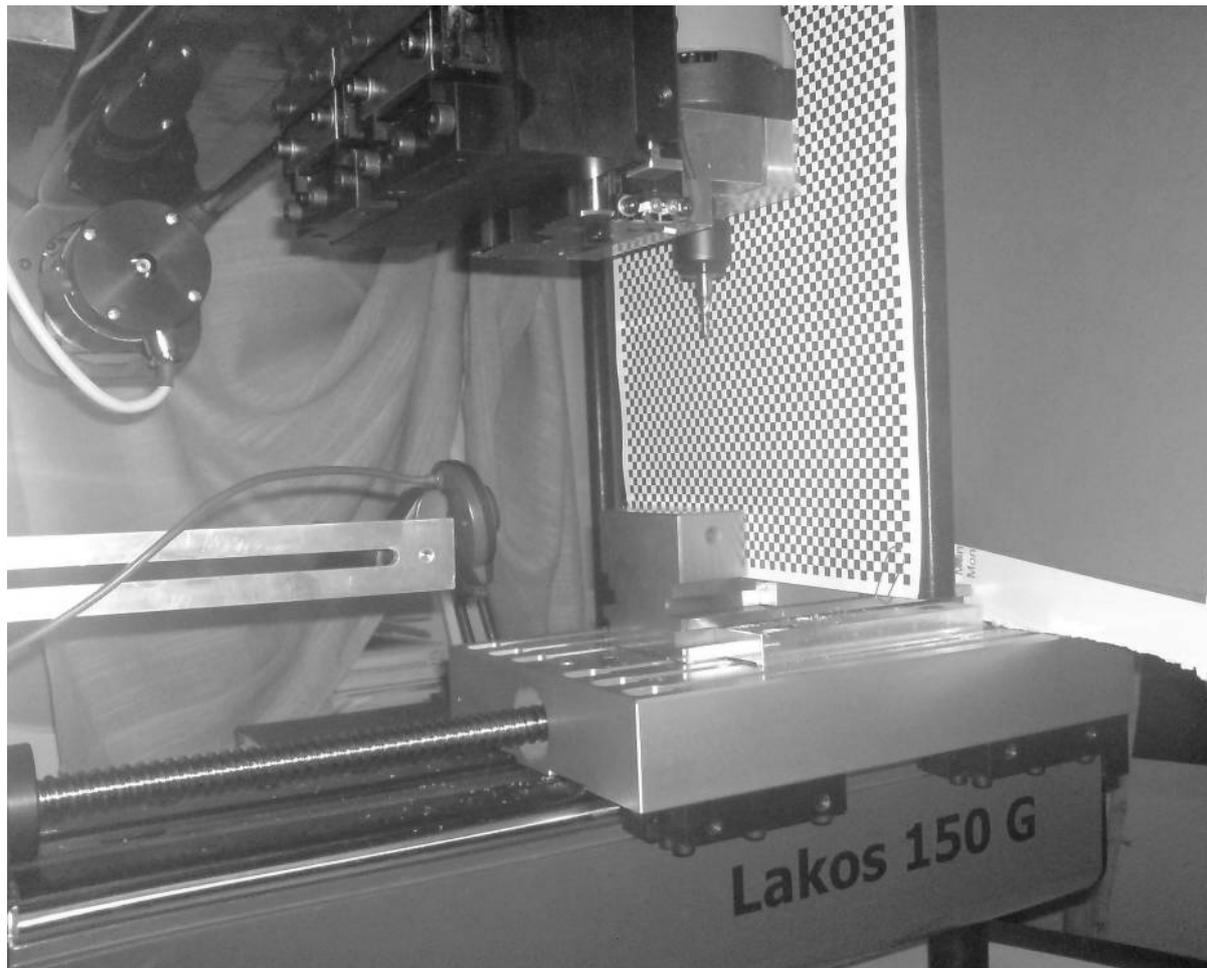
Stand holder for the camera and camera on the LAKOS 150G milling machine.
